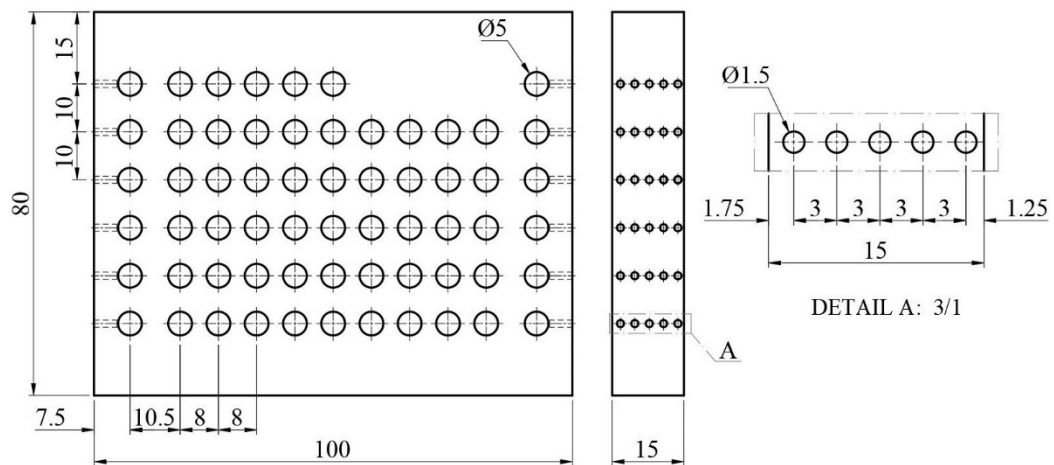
Positions of the test holes and thermocouple holes on the specimen.
